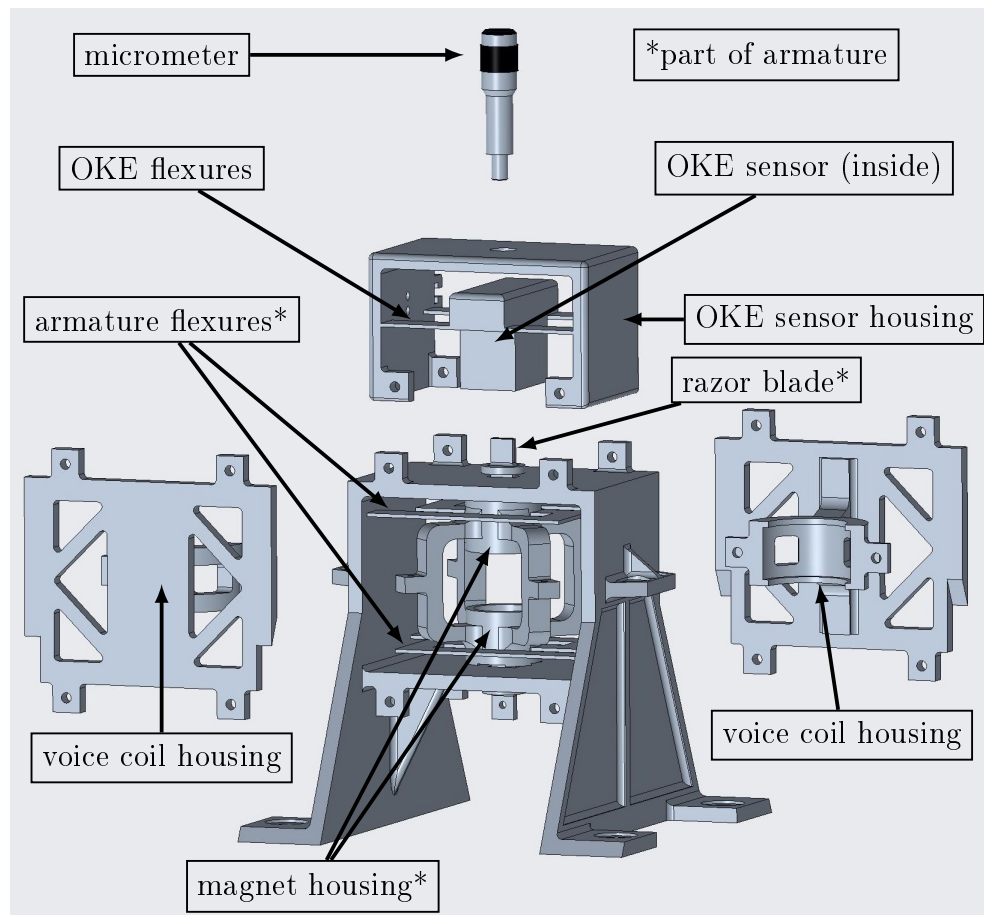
Voice Coil and OKE Sensor Housing Exploded View
